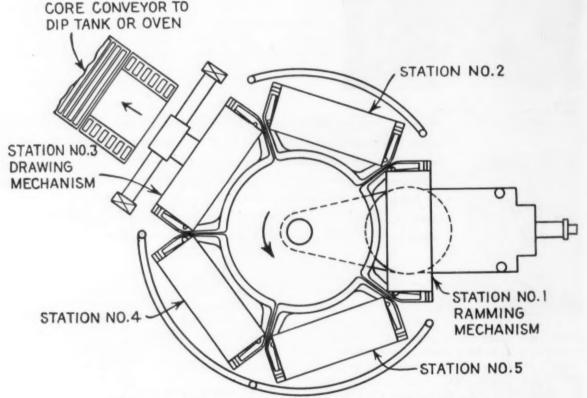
Outline plan view of the indexing core making machine showing the five stations through which the table is indexed in each core making cycle.
